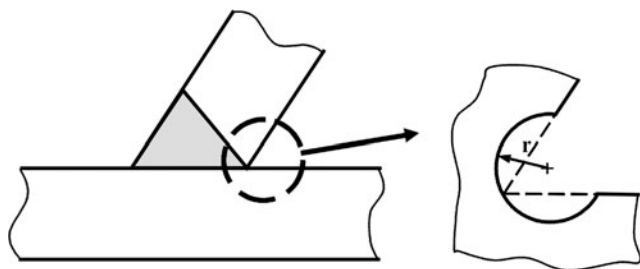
Notch rounding of the weld root of a Y joint
